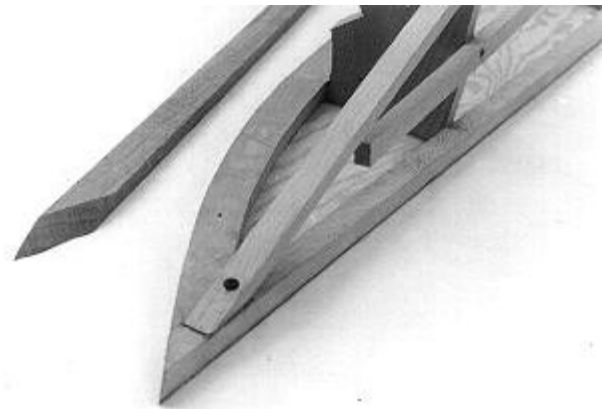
The RUNNER SHEER #8 and CHINE #10 are pre beveled to to the dimensions given, although further fitting may be required. The RUNNER SHEER #8 has been set back to allow for fairing.
